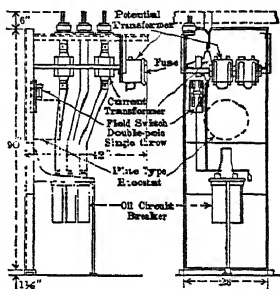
Construction and Assembly of A.C. Generator and Feeder Panels
